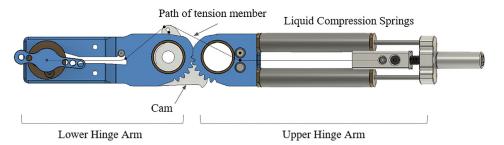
Side view of the hinge mechanism. Components include lower hinge arm, tension member, cam, upper hinge arm, and liquid compression springs.
